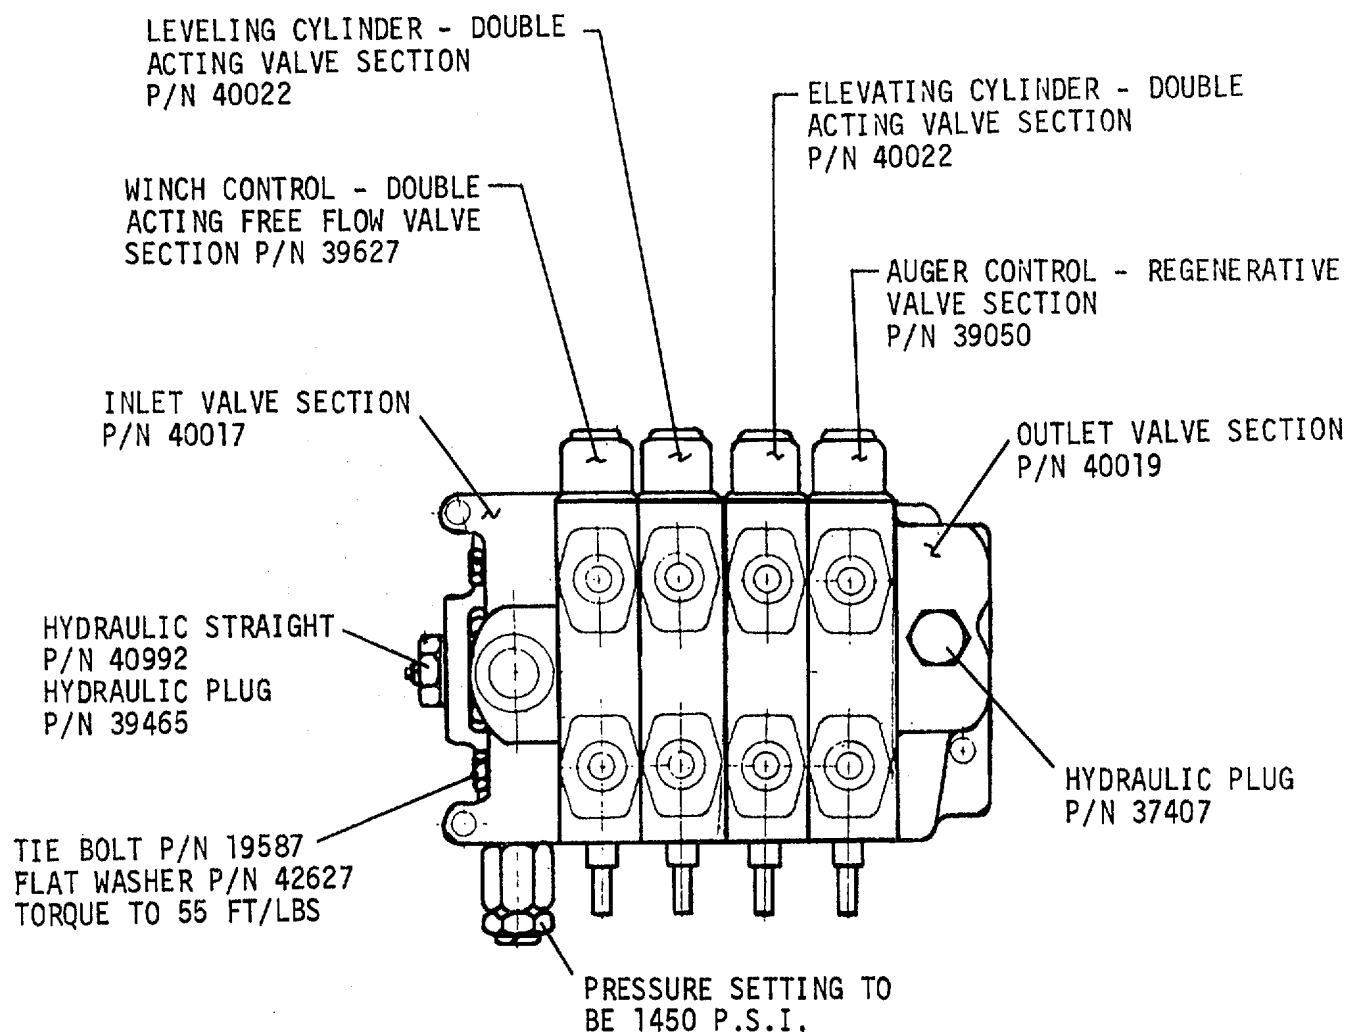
CONTROL VALVE BANK ASSEMBLY
